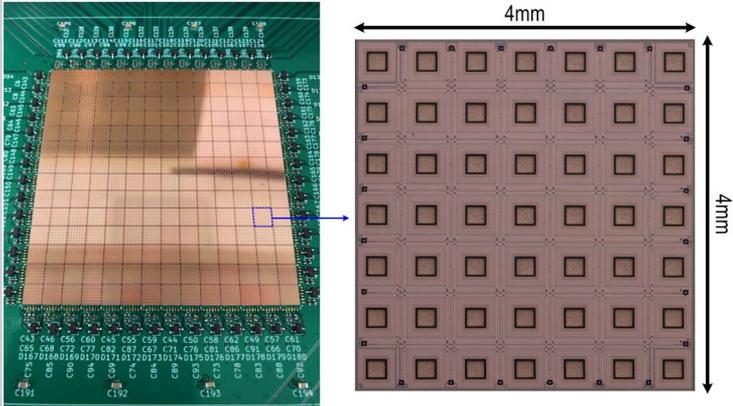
Photos of the CMOS chip and the array assembly.
